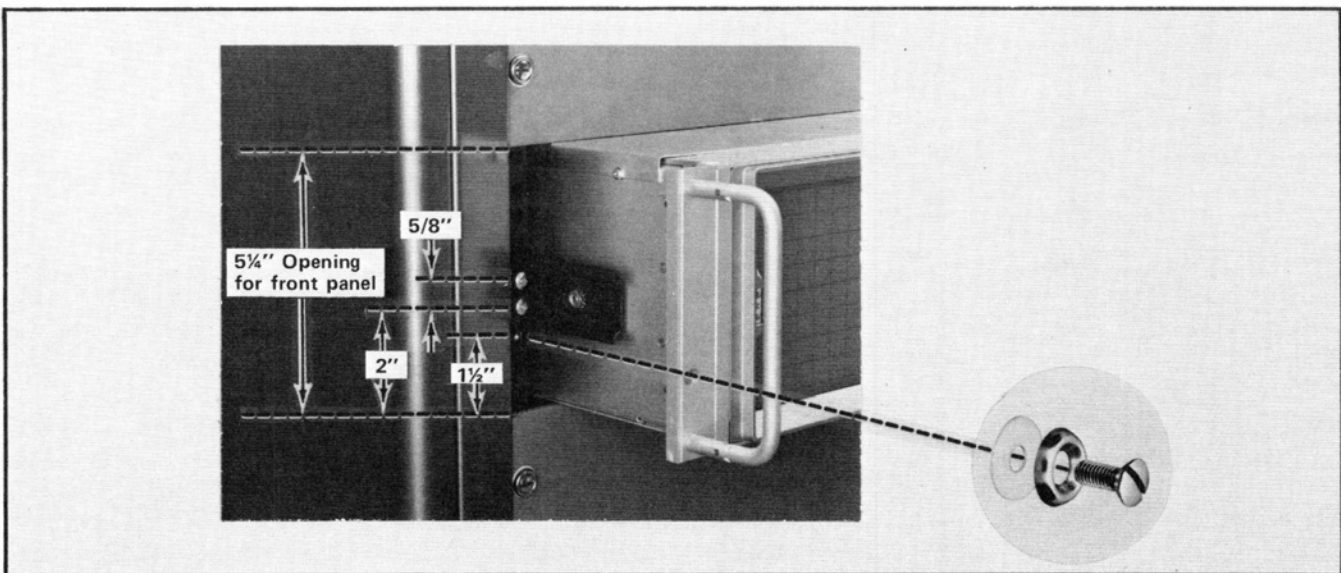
Vertical mounting position of the left stationary section and location of the thumb screw securing hole. These same dimensions apply to the right front rail.
